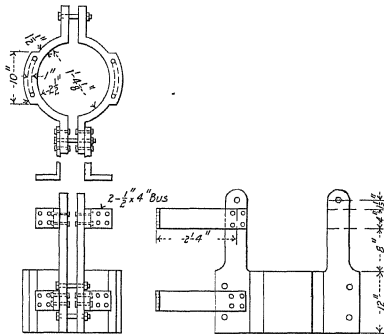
16-IN BOLT TYPE HOLDER, FURNACE No 1
